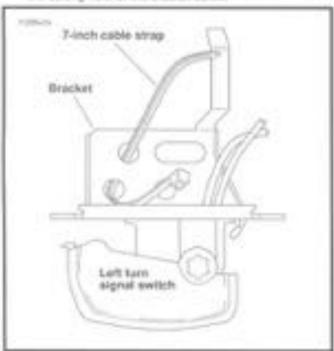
, Insert Cable Strap in Sieltch Bracket
